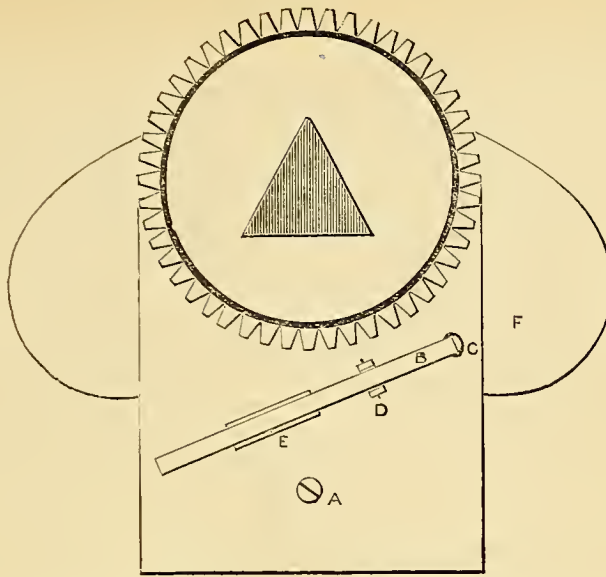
BACK VIEW OF SHUTTER WHEN COMPLETED.—FULL SIZE.
